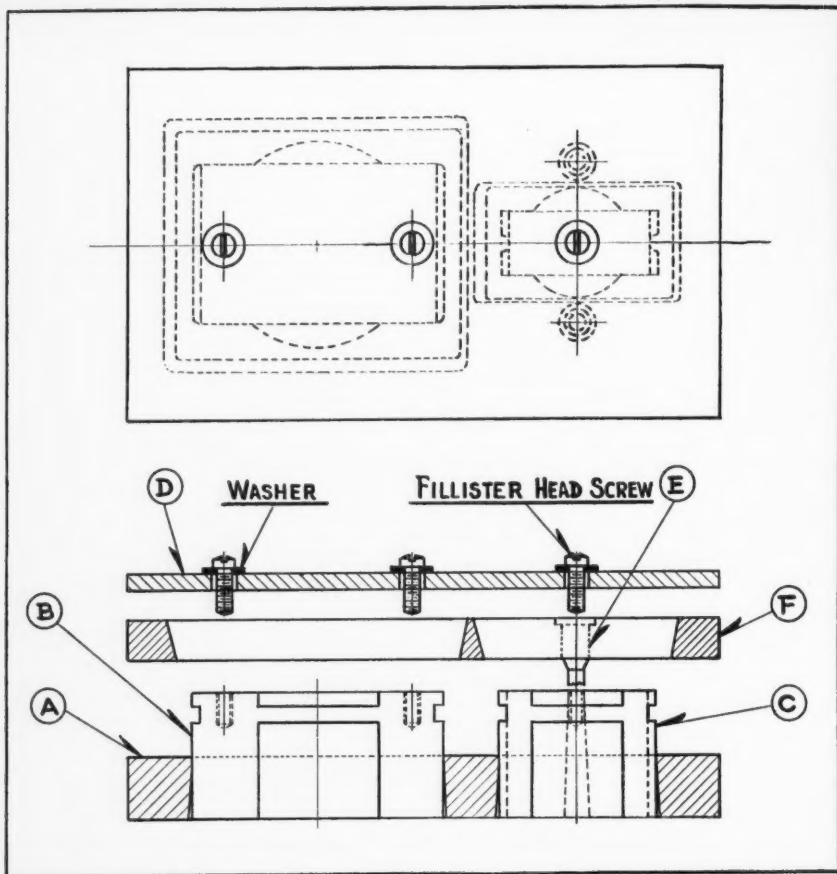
Drawing showing arrangement of punch parts before they are fastened together.
